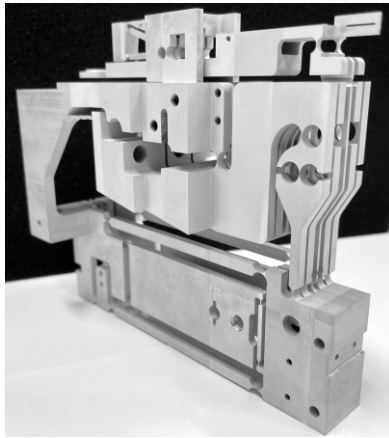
Novel weighing cell mechanism with manufacturing fixtures. The geometry is optimized for electrical discharge machining.
